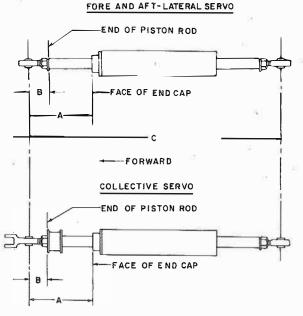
55. Rigging Dimensions — Main Rotor Auxiliary Servo Units
